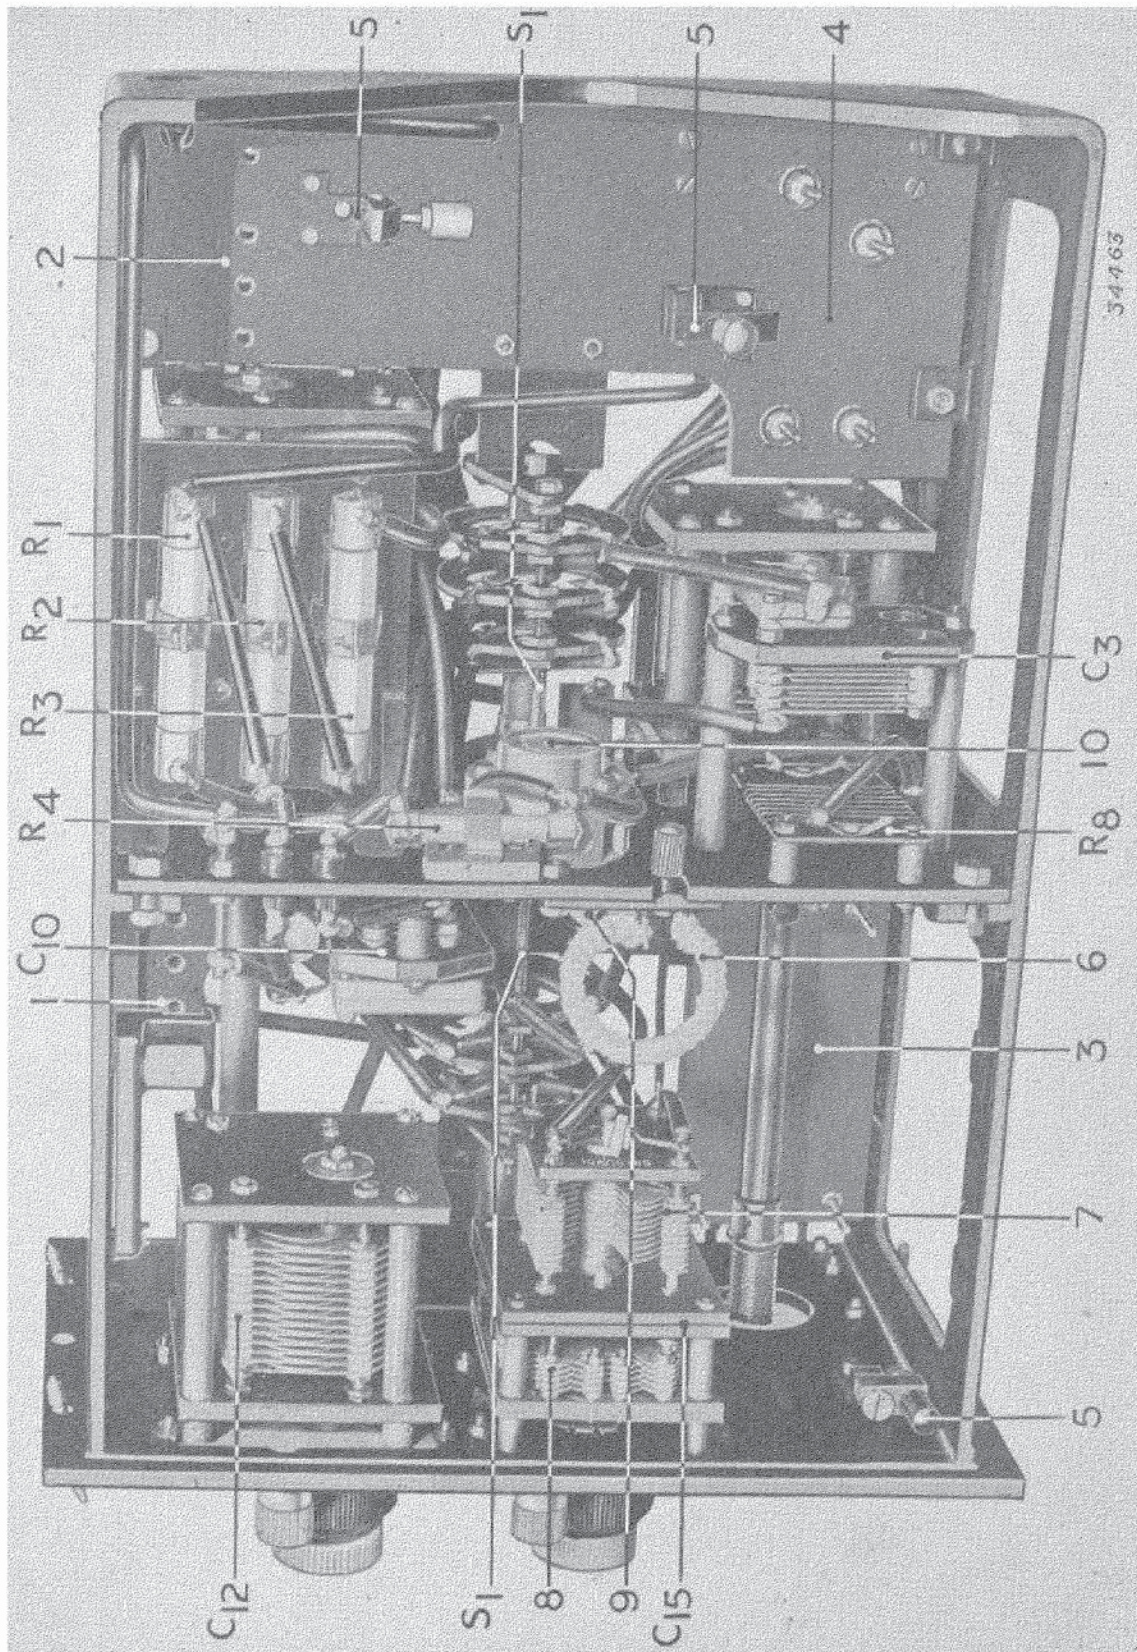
BOTTOM MEMBER, INTERIOR, UNDER SIDE VIEW
